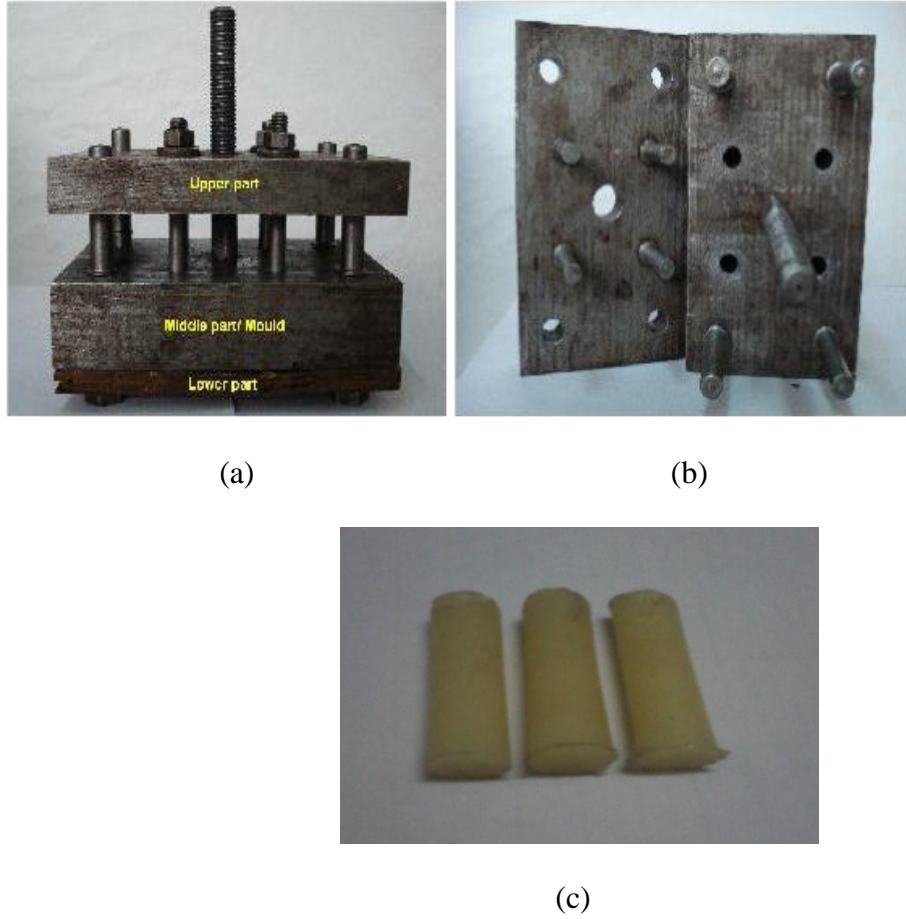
(a) Steel moulds designed for the preparation of cylindrical (pin) type specimens, (b) Two halves of the mould & (c) Fabricated cylindrical samples.
